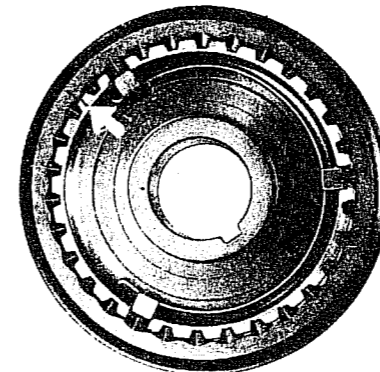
Synchroniser hub and sleeve alignment marks.
